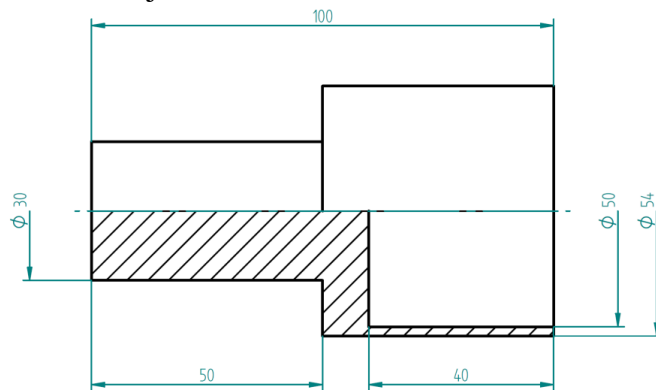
Technical drawing of the hollow cylindrical sample with 2 mm wall thickness.
